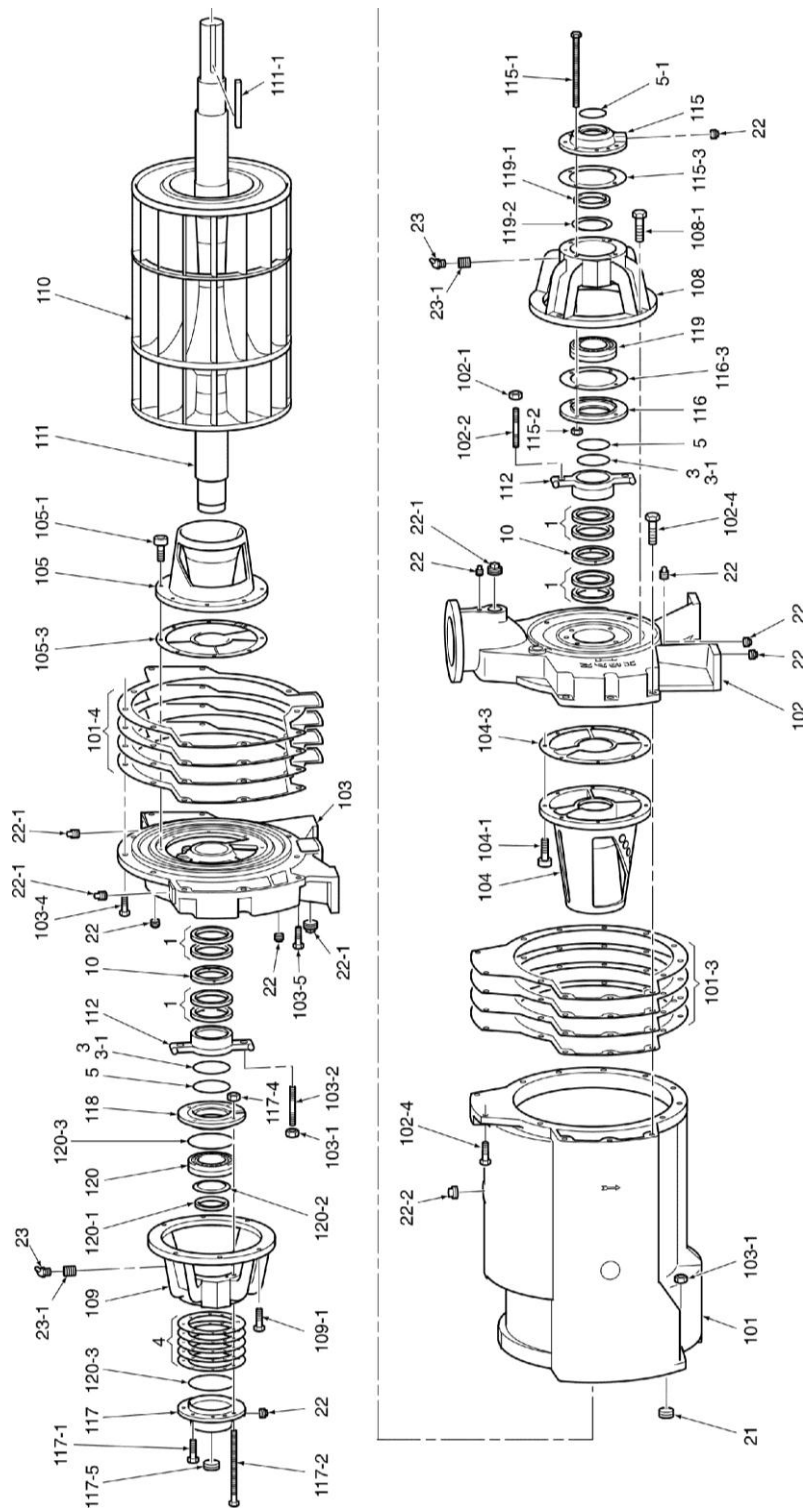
Exploded view of TC-8 to TC-10 (delivered version may differ)
